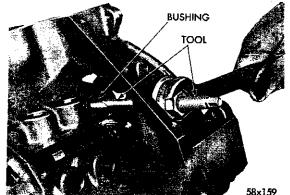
Removing the Distributor Drive Shaft Bushing Using Tool C-3052
